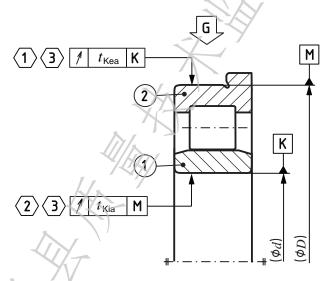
Geometrical tolerances for single components for bearing with flanged outer ring
